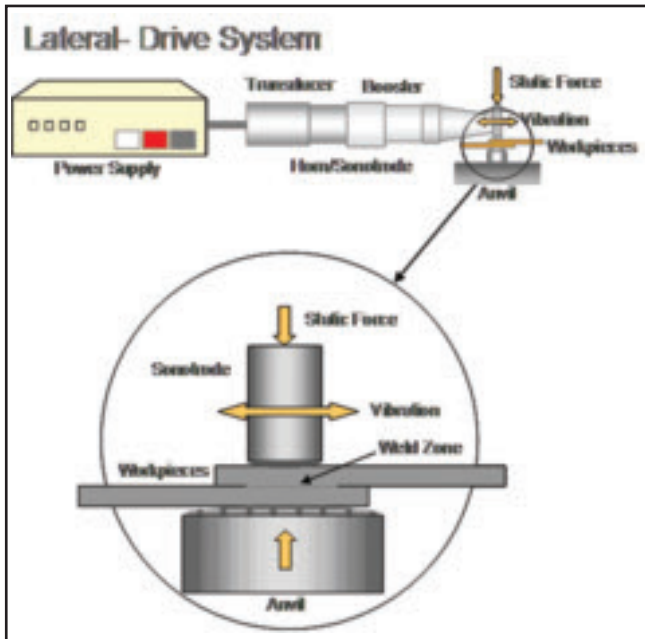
Schematic layout of a lateral drive ultrasonic spot welding (USW) system with details of reactions at the workpiece itself.
